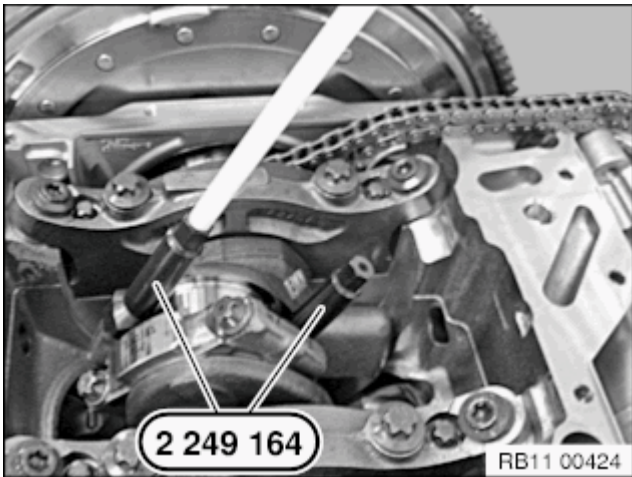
Identifying Special Tool 2 249 164 Secured To Connecting Rod
